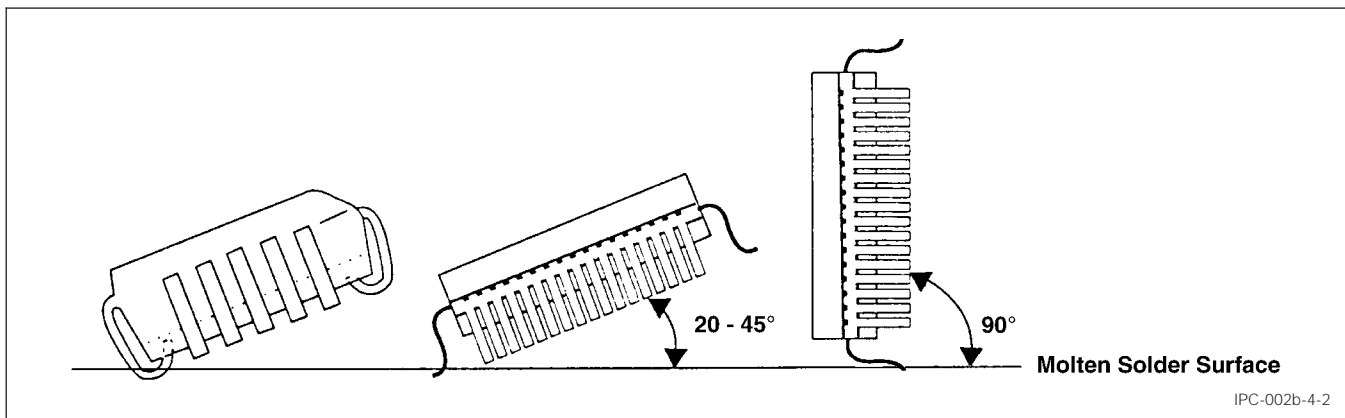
Solder Dipping Angle for Surface Mount Ledged Components
